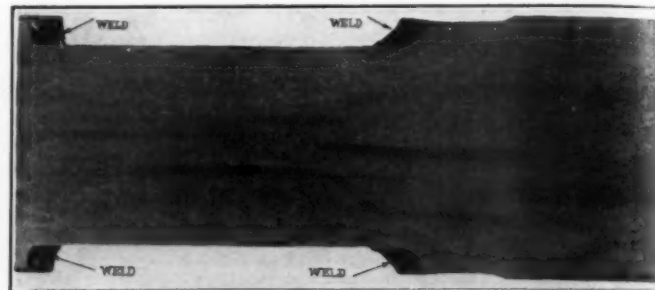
Longitudinal Section Through a Car Journal Welded By the Gas Method
